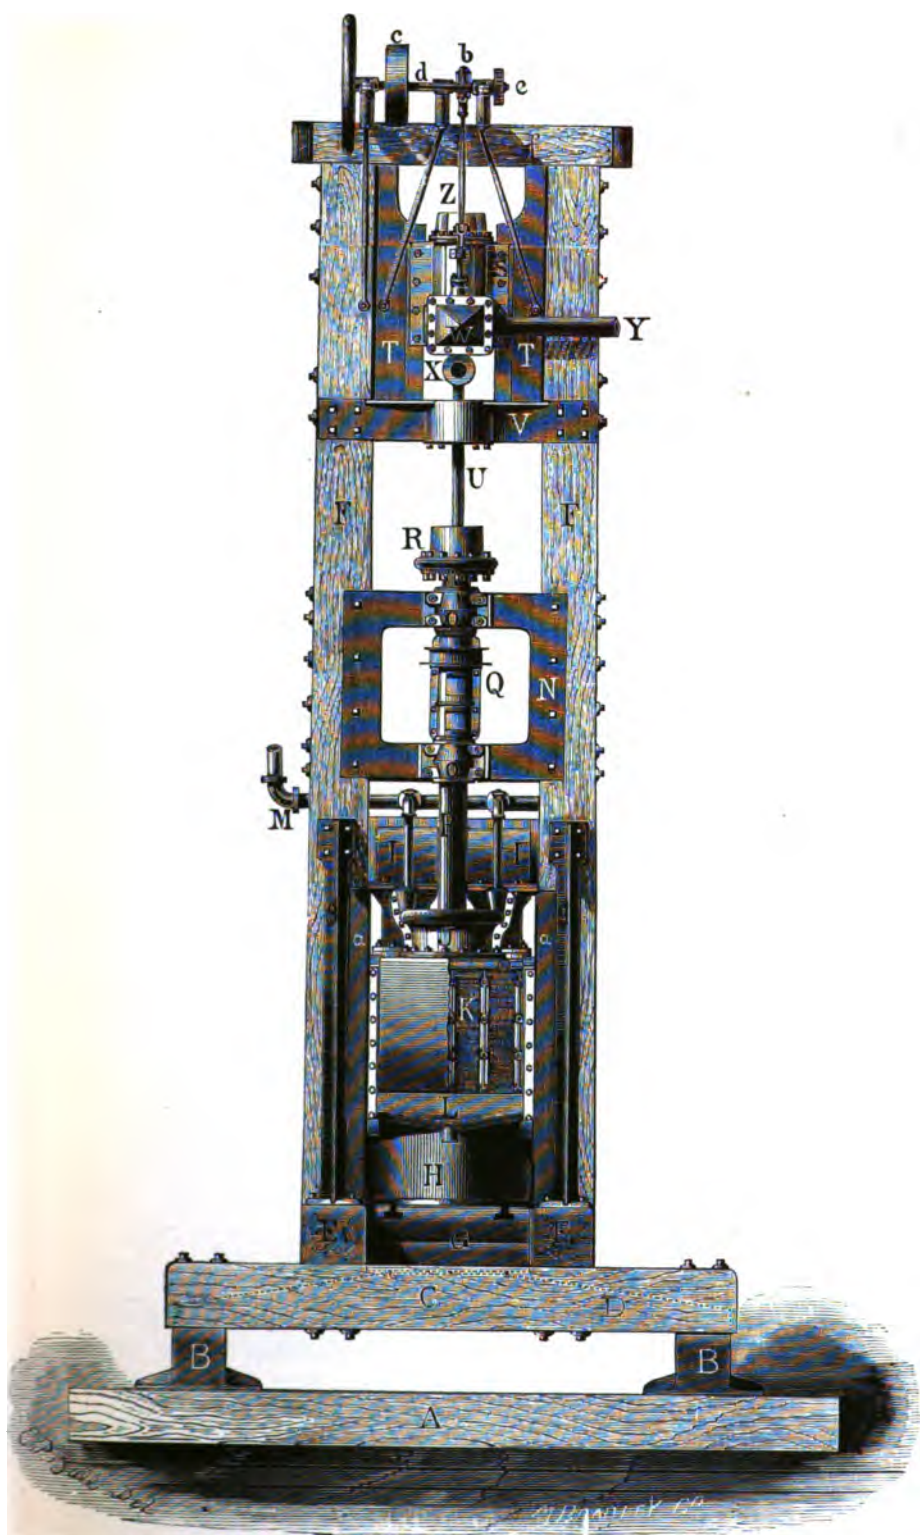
FRONT VIEW OF THE BALL STAMP.
